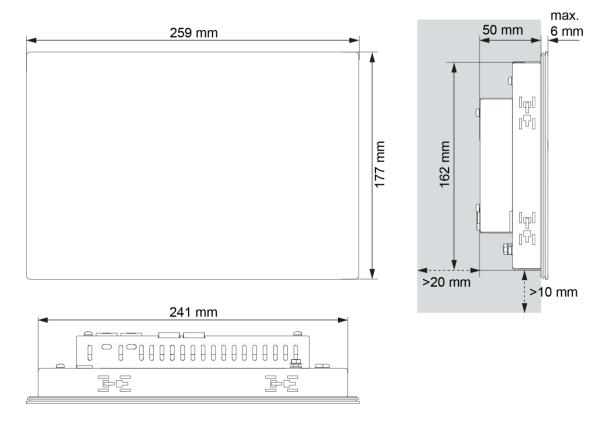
Dimensions DC2110W X CM / ET2110W X CS
